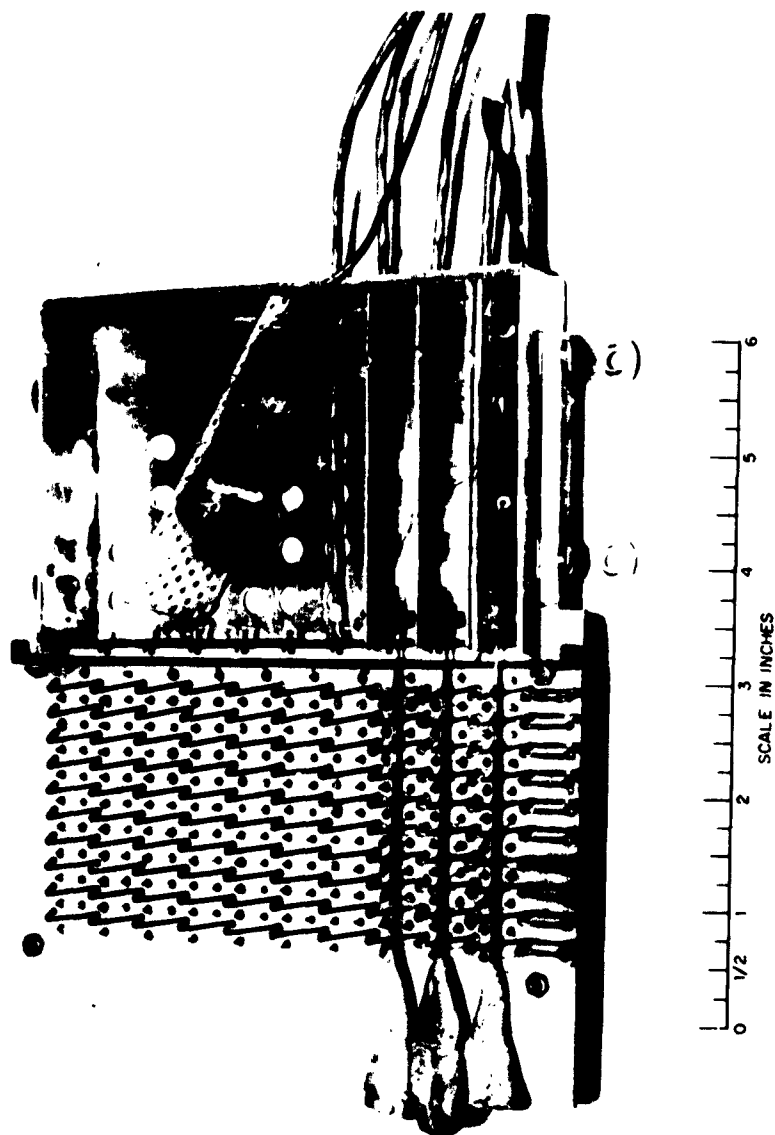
DELAY-LINE MODULE, PARTIALLY ASSEMBLED
